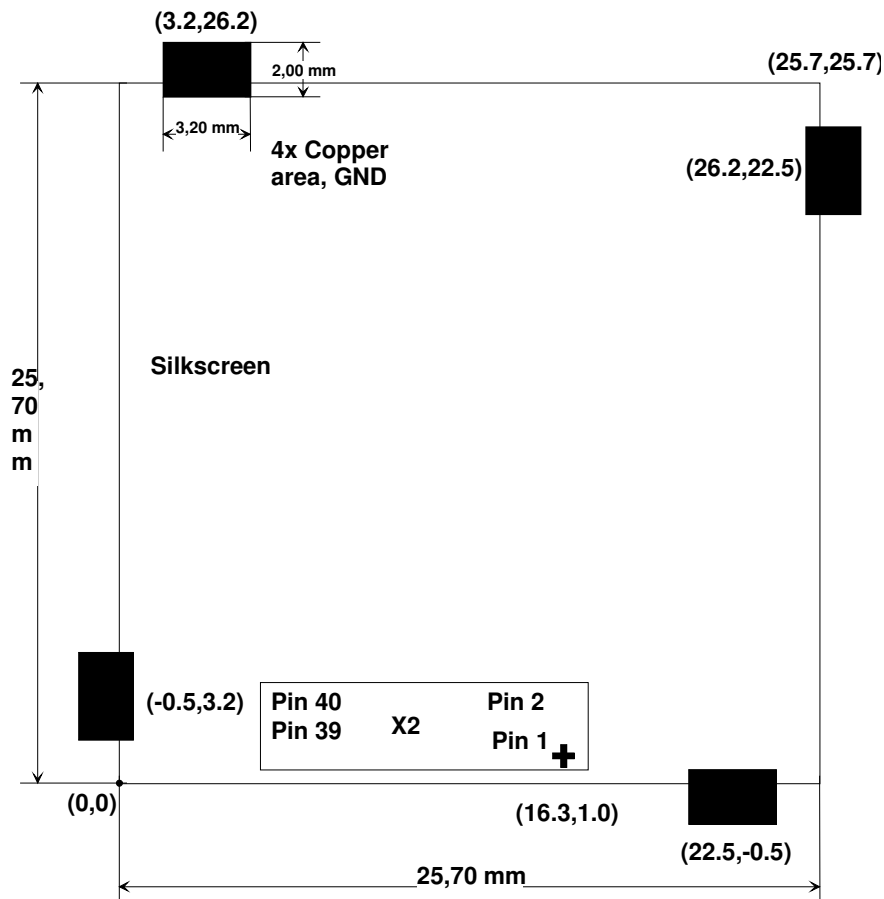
Pad dimensions for GND soldering pads, top view. Solder GND pads to the shield of the IT03-02 module.
